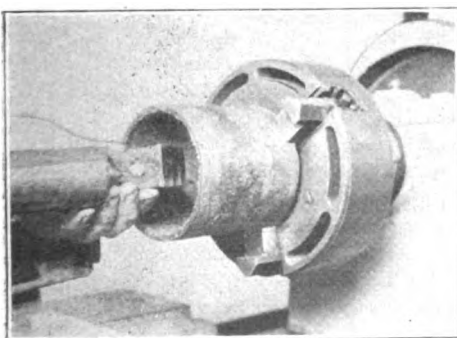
Hold the Tub Securely in Chuck With Tail Stock Center.
